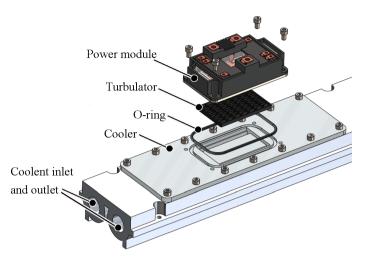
3D CAD model of the half bridge 10 kV SiC MOSFET power module and cooler assembly.
